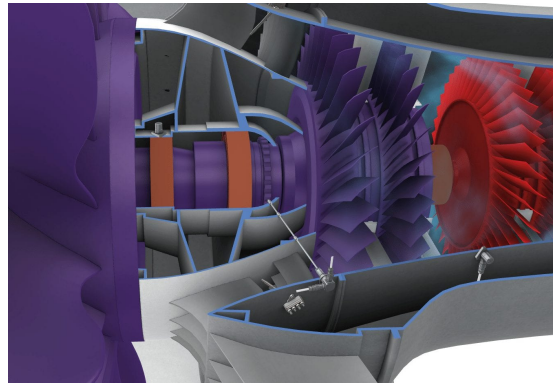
Gearbox that presents on the external shell vibration sensors([1])
